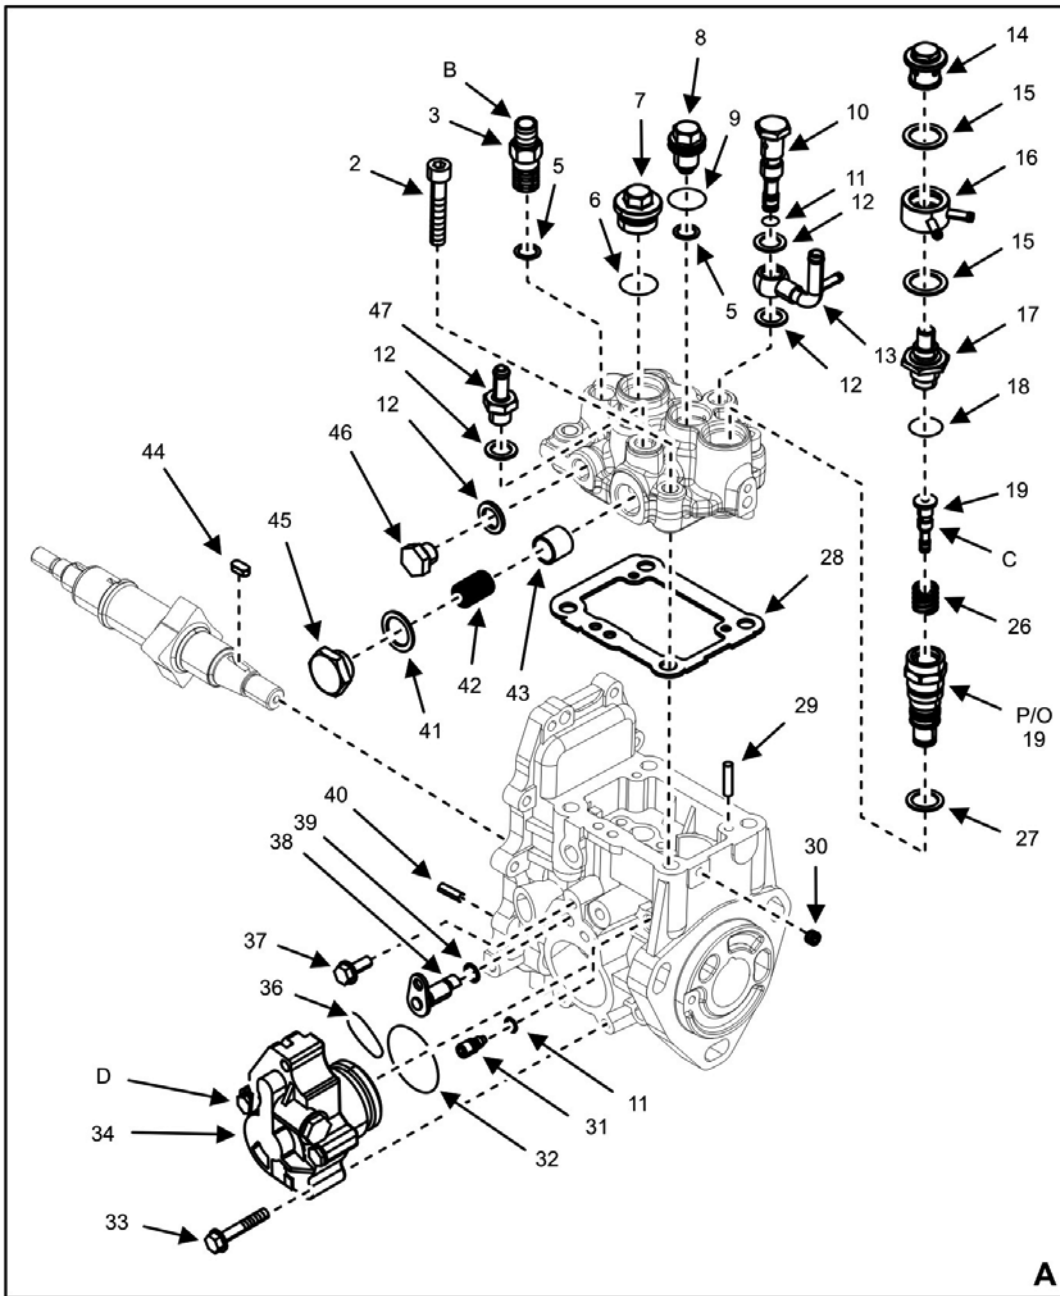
Fuel Injection Pump (Sheet 2 of 4).
